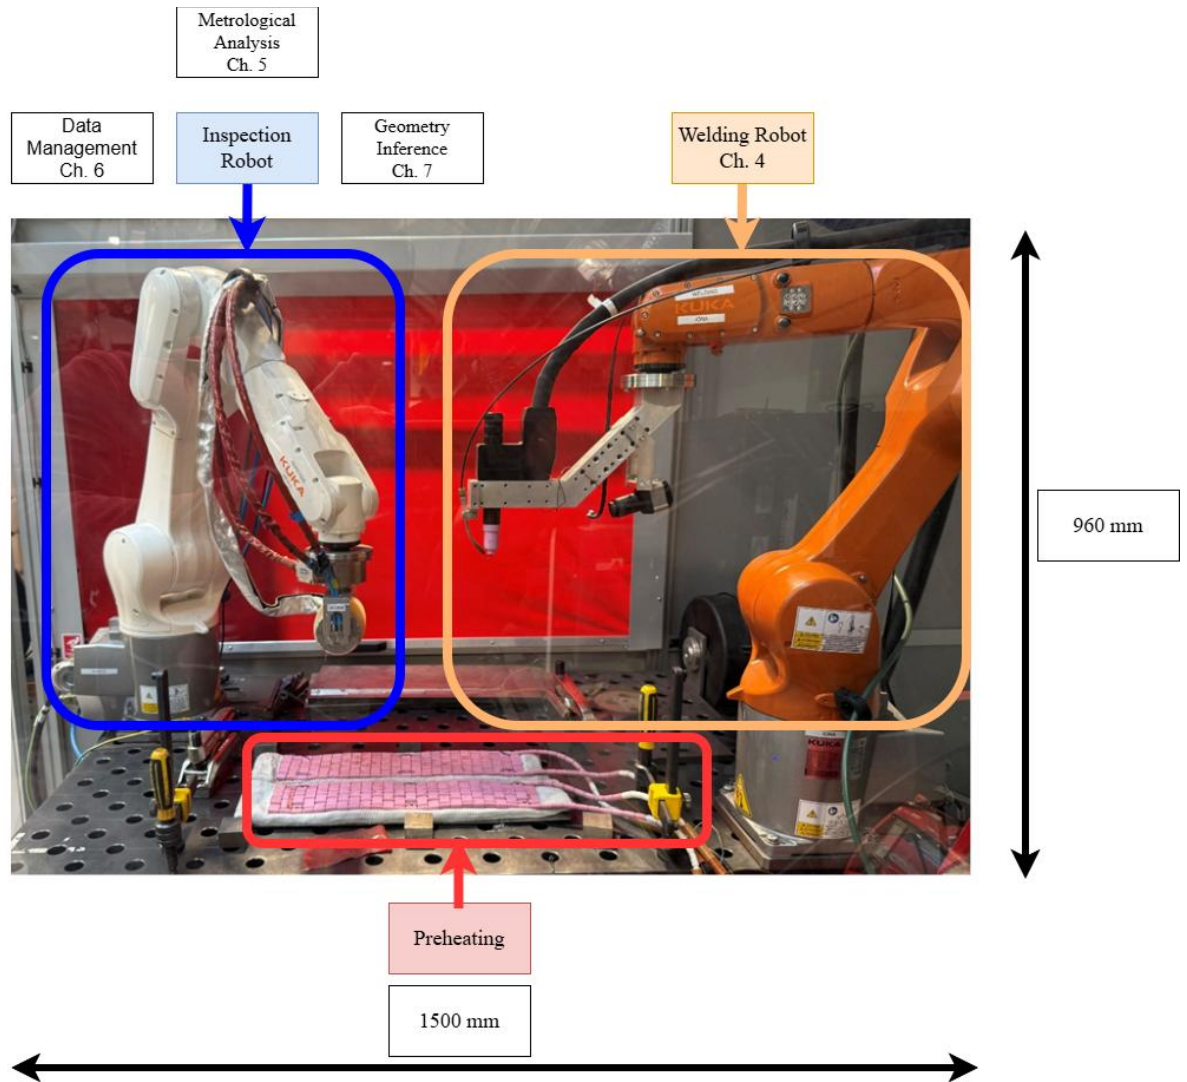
Overview of the dual-robot welding and inspection cell at CUE, University of Strathclyde. The white KUKA KR10 inspection robot (blue boundary, left) carries the RollerProbe end-effector; while the orange KUKA KR10 welding robot (orange boundary, right) carries the GTAW torch assembly. Preheating blankets on the Siegmund welding table are visible in the foreground.
